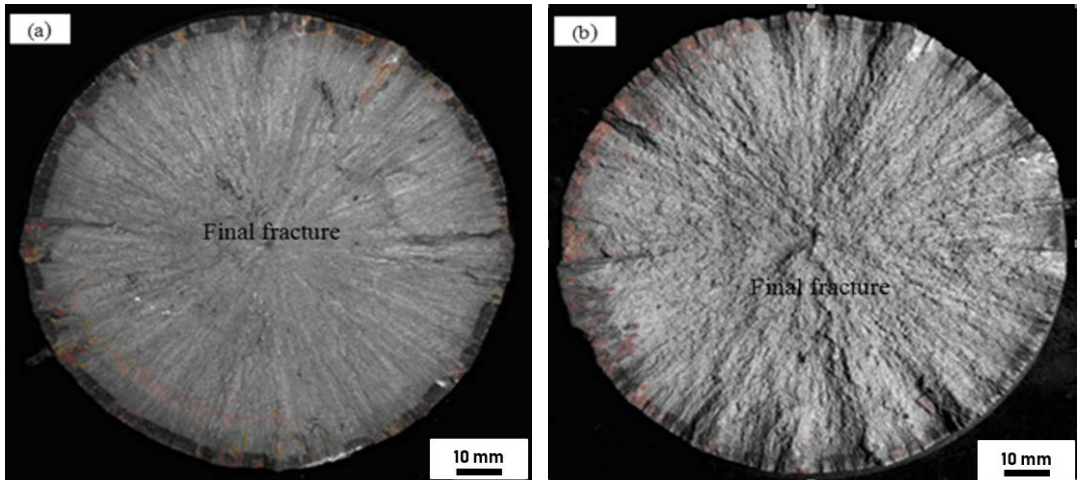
Fracture surfaces of the failed roll (a) drive side (b) top side
